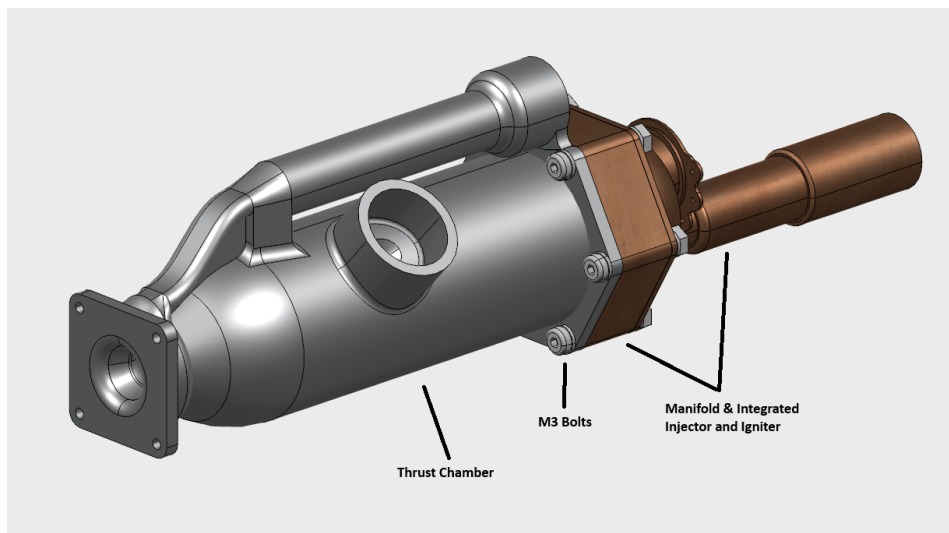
Off-center coaxial swirl injector and glow plug igniter configuration CAD model
